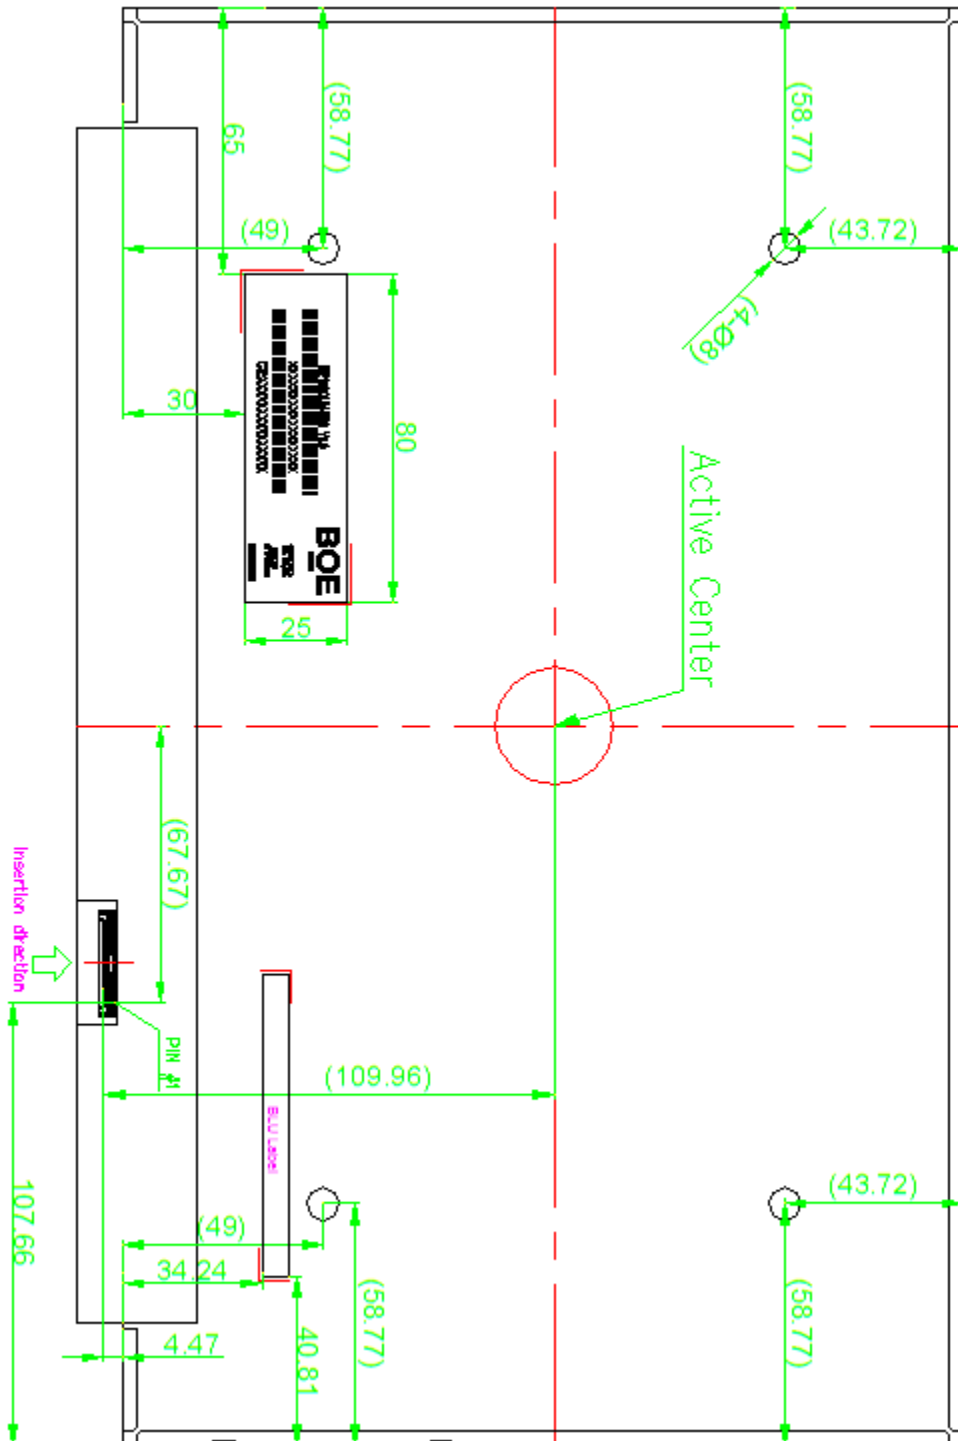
TFT-LCD Module Outline Dimensions (Rear view)
